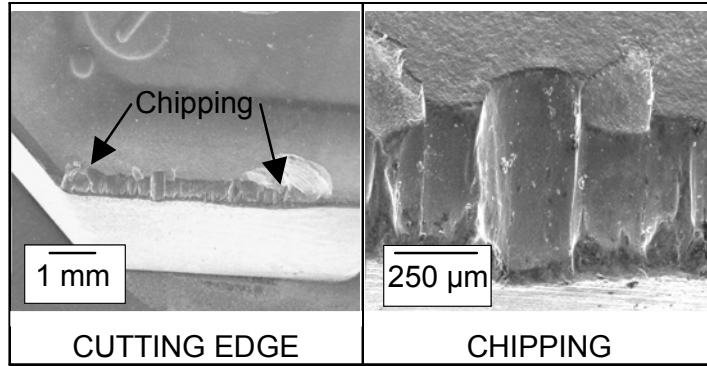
Tool Cutter cutting edge chipping during the machining of the 3.0L V6 engine blocks with cast iron liners.
